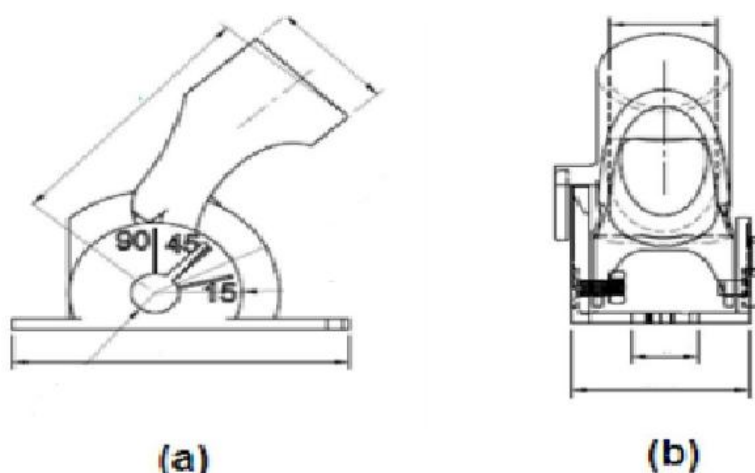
and 4b. illustrating a side view and front view respectively of the device
